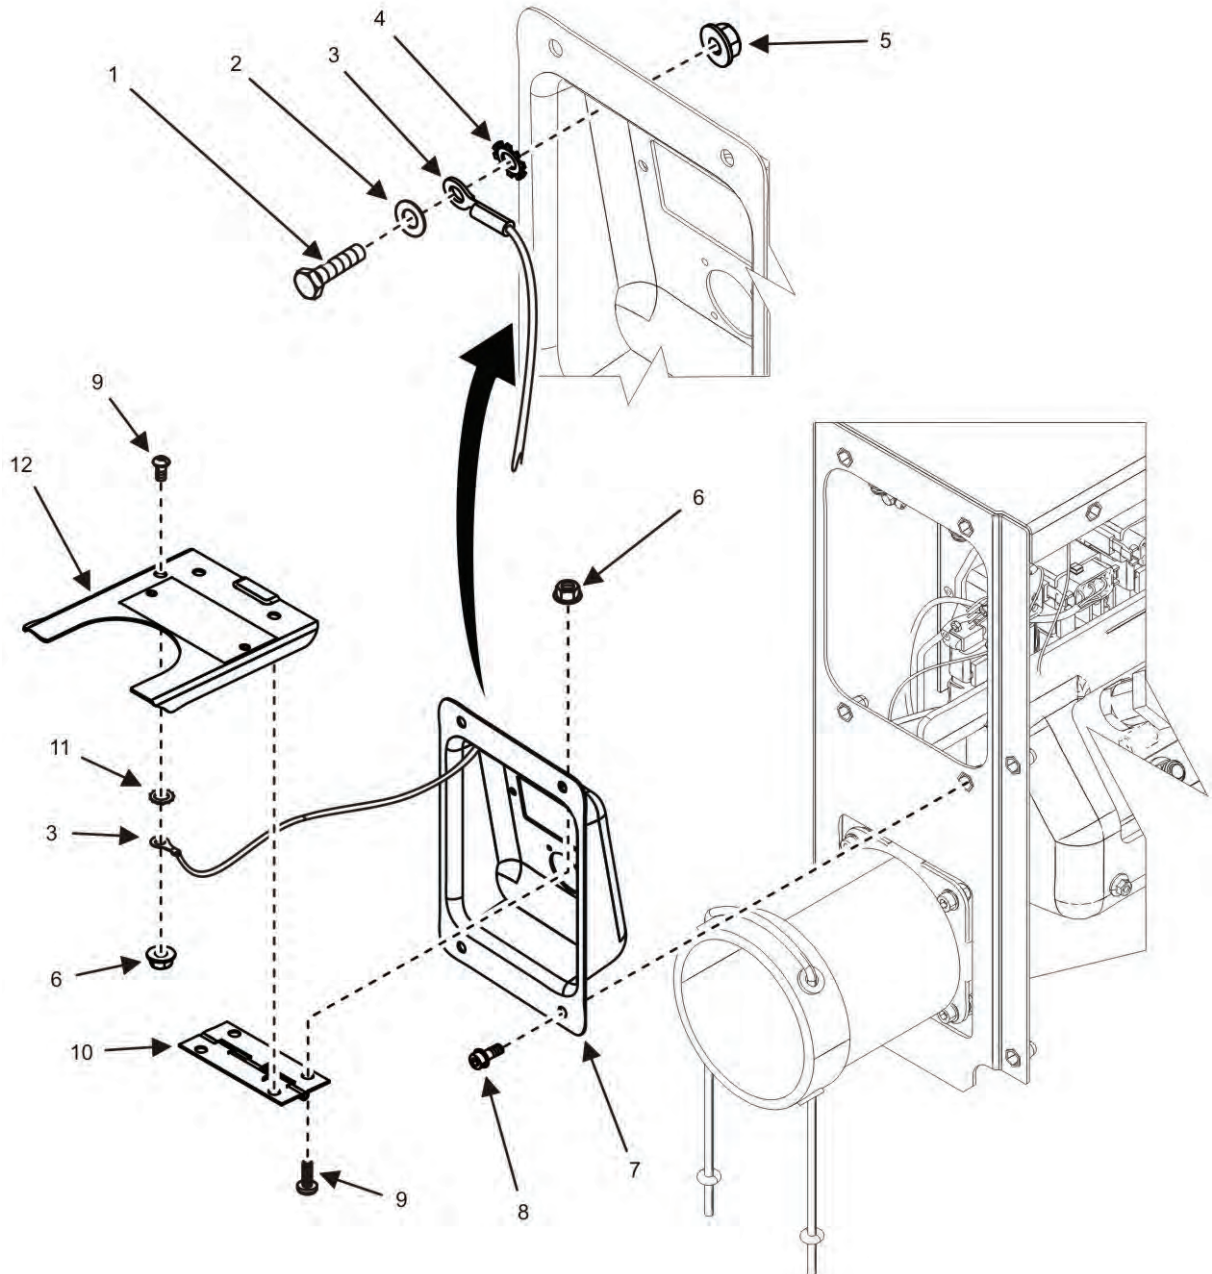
Convenience Receptacle Assembly (Sheet 1 of 5).
